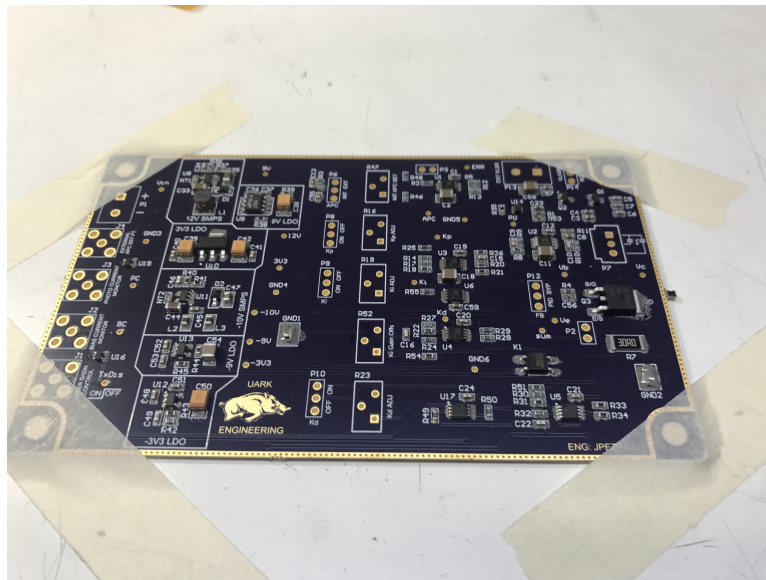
All SMT components have been manually placed on PCB and ready for reflow.
